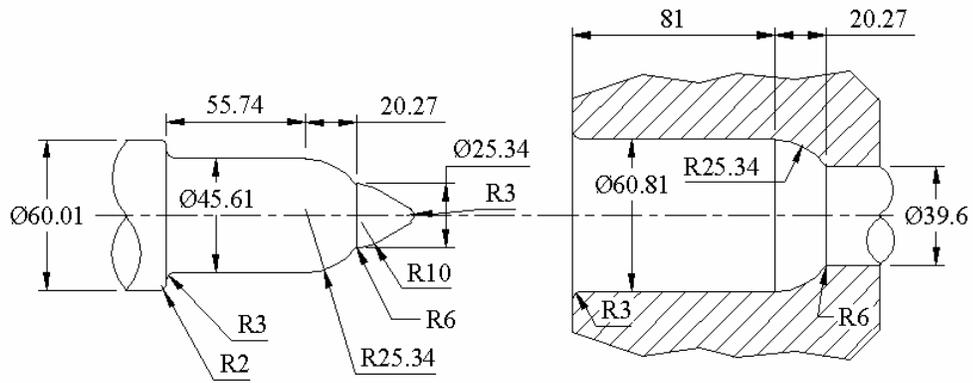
Header tool and gripper die of 2nd stage [3]
